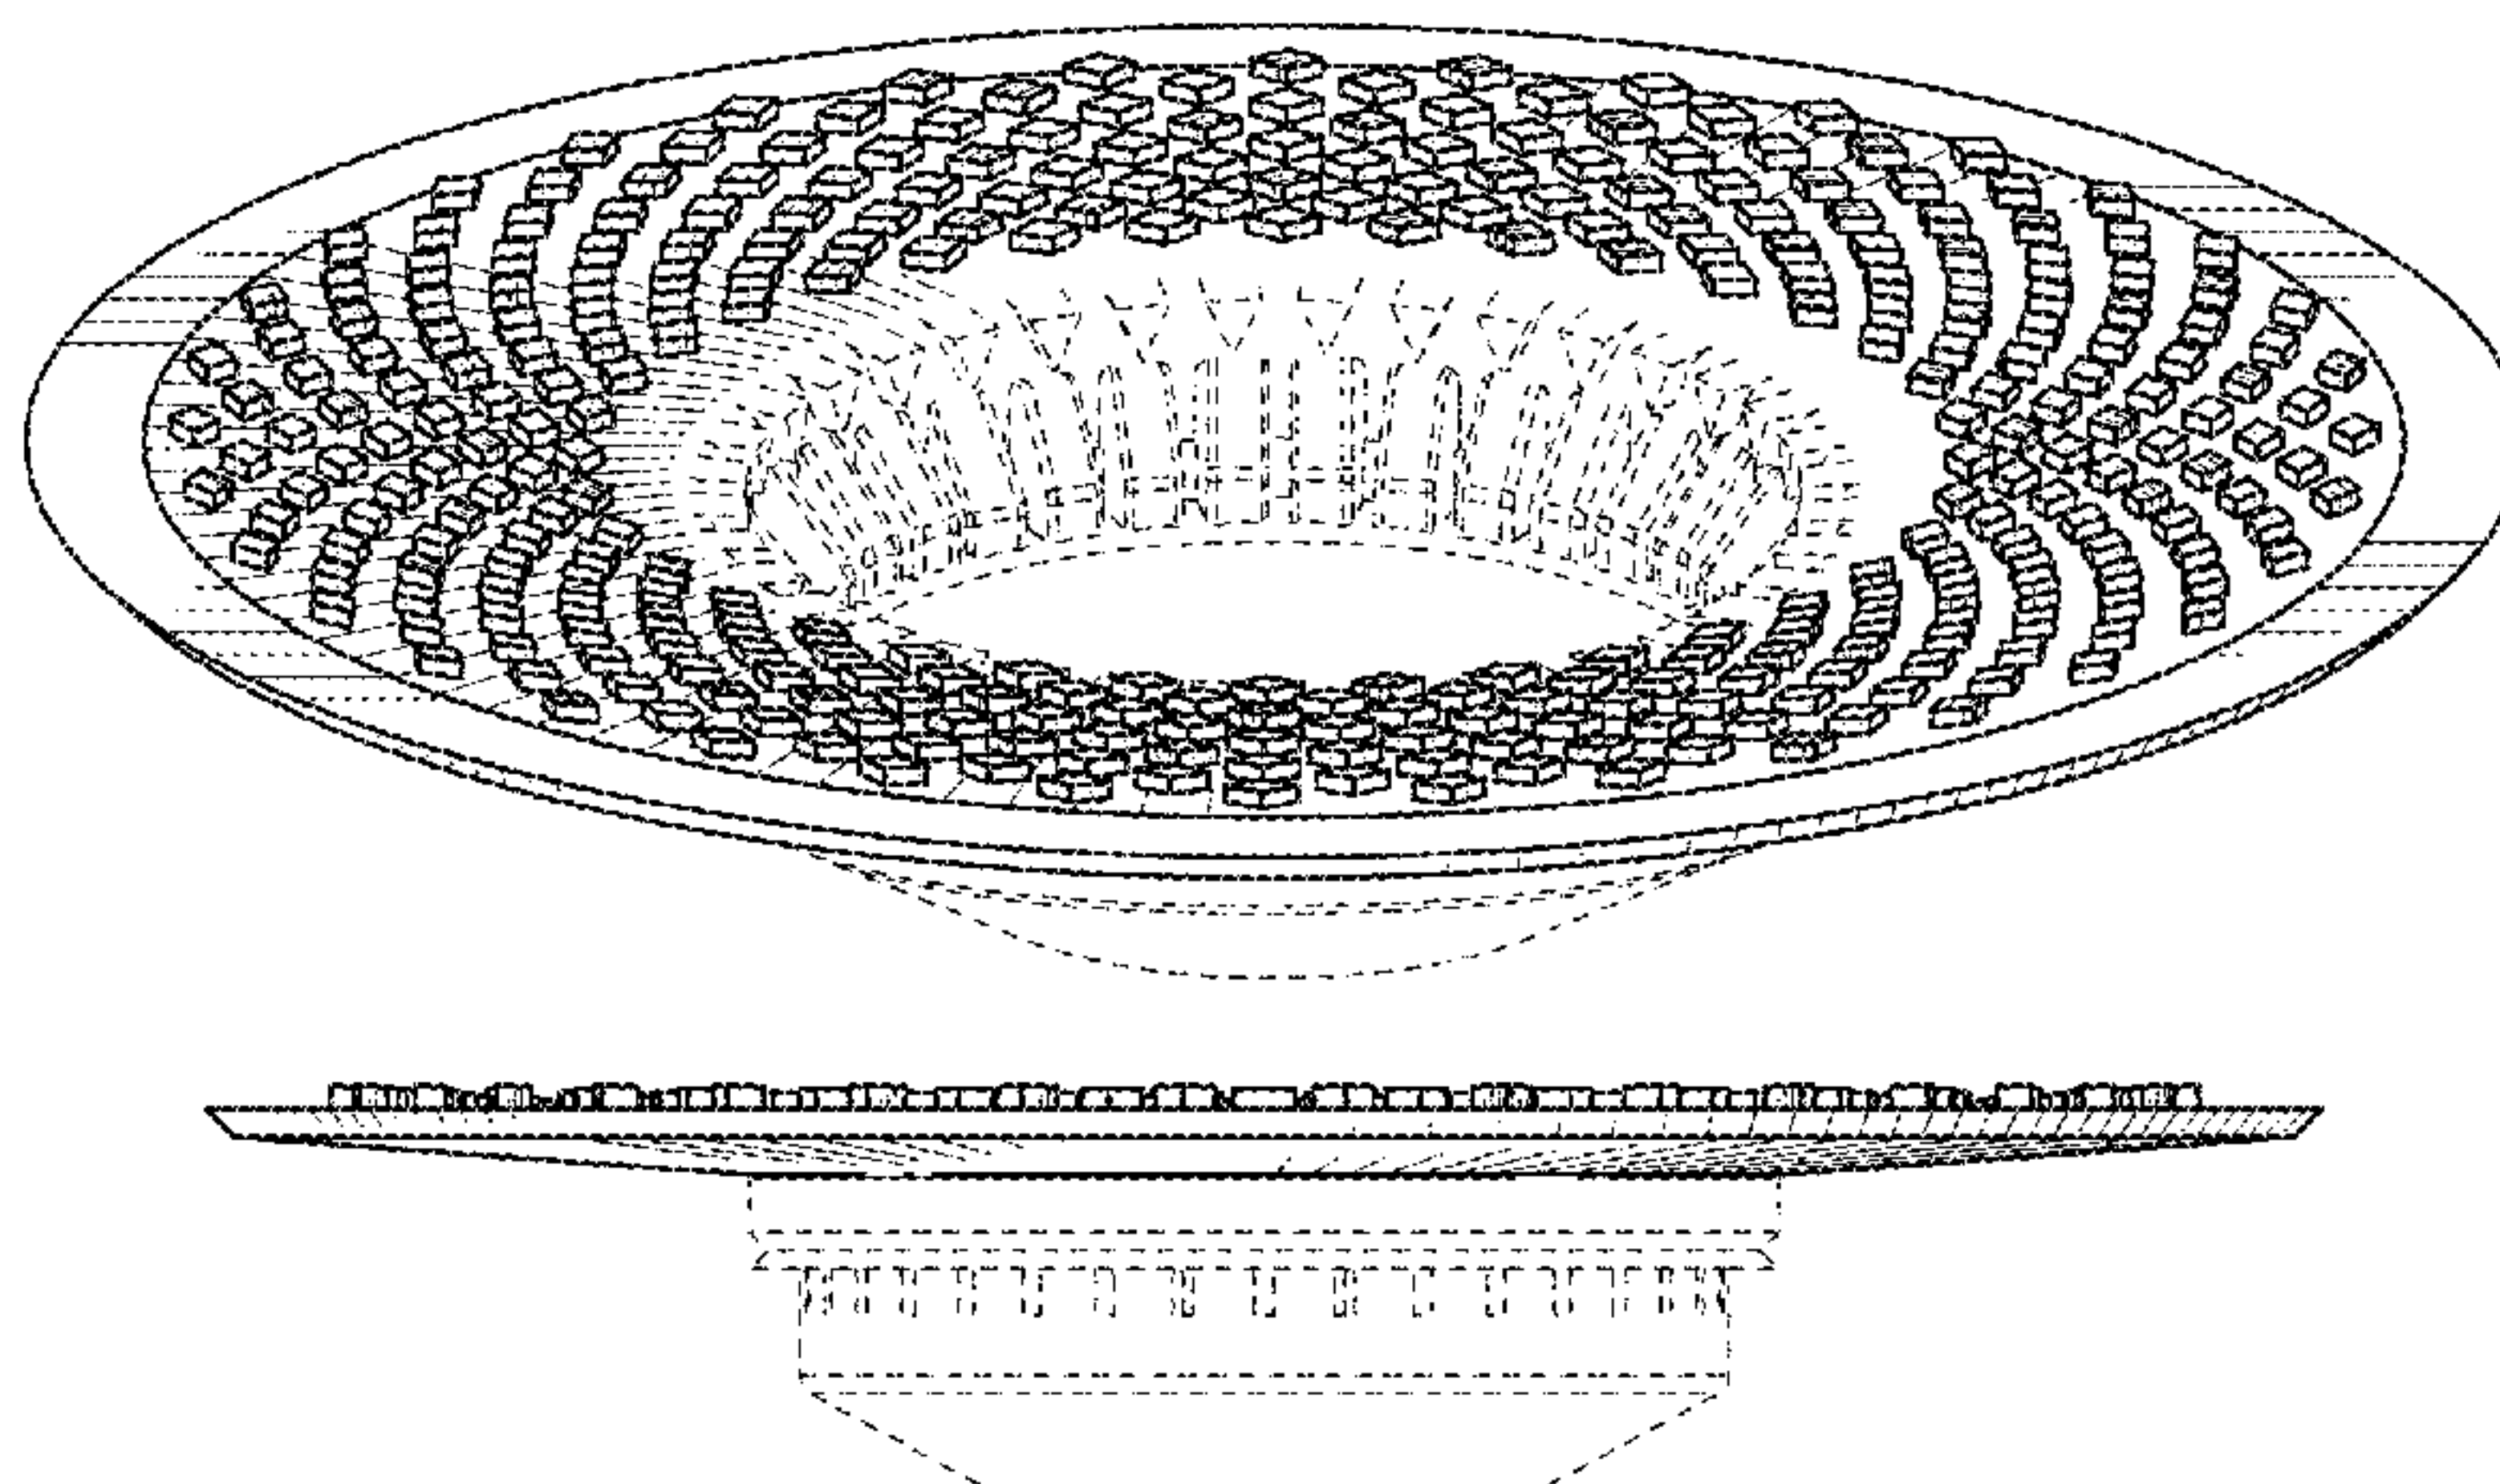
is a top view of the embodiment of the rotor disc as shown in FIG. 1; and,
